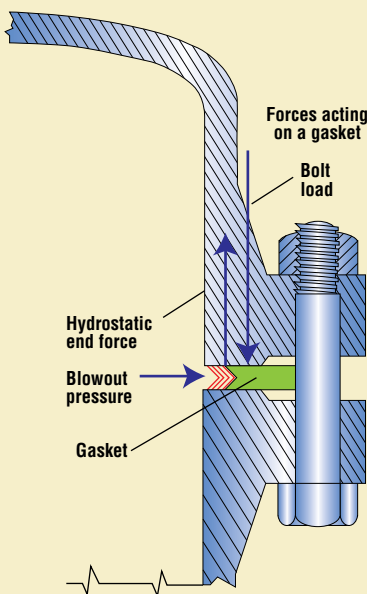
In order for a flange to seal, the bolts must be tight enough to overcome the hydraulic end load acting on the flange, while compressing the gasket. The frictional forces of the compressed gasket must be higher than the internal pressure, otherwise it will be extruded through the gap
